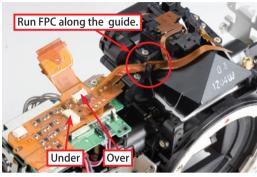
Routing FPC of DC/DC PCB Ass'y
